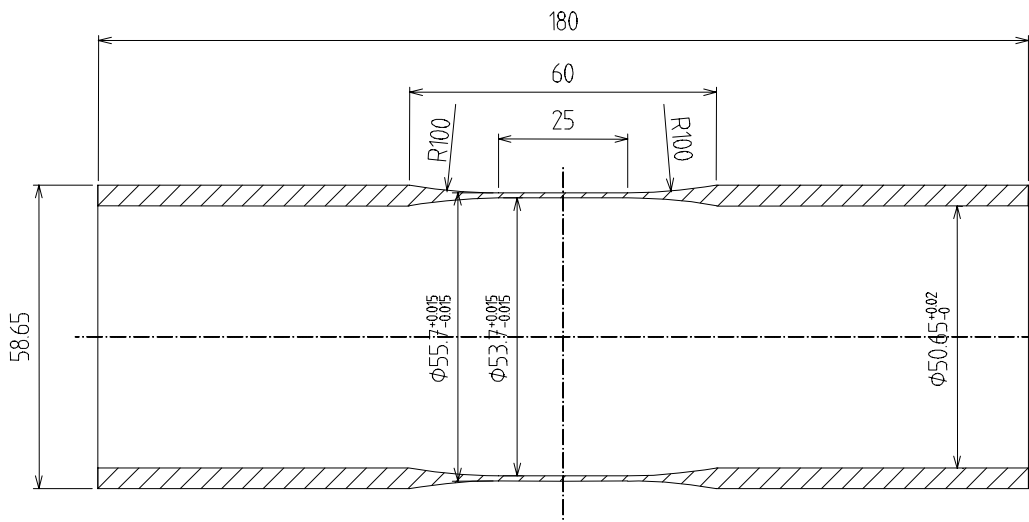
Shape and dimensions (in mm) of the developed specimens for the preliminary and the finally multi-axial tests.
